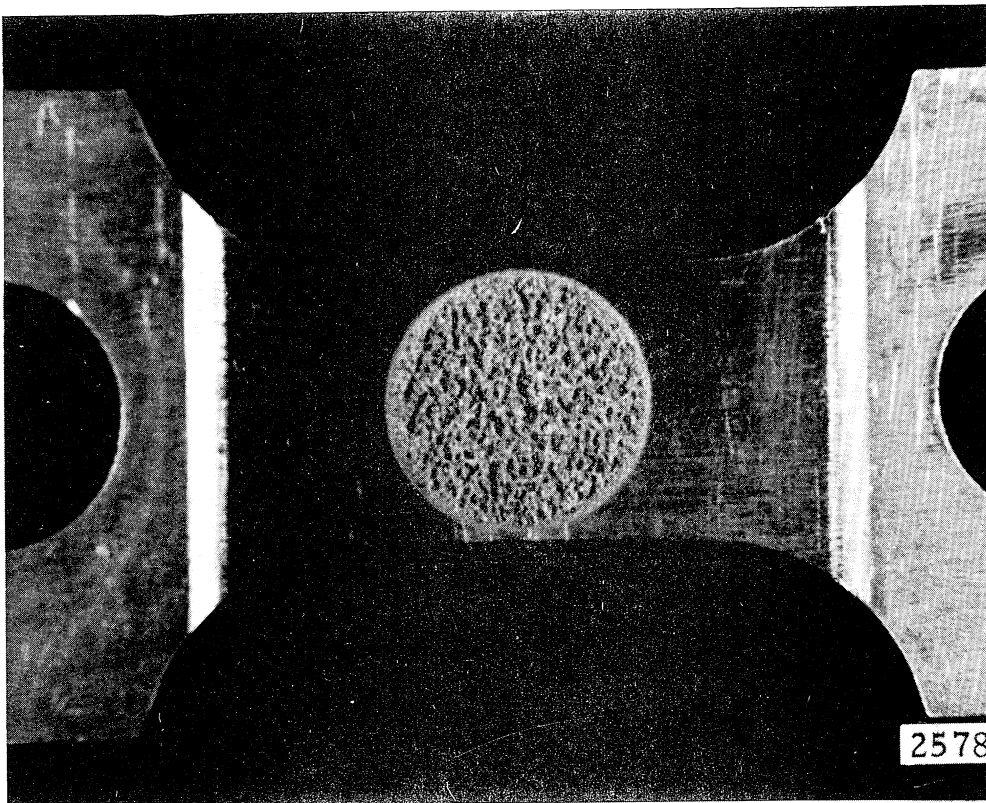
Center Damage Area of a Specimen with a Reduced Cross Section Prior to Tensile Pull
